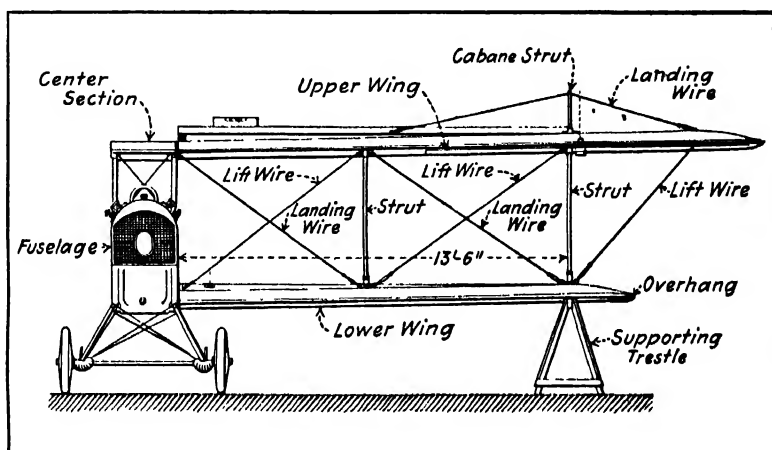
Diagram Showing how Braced Biplane Wing Assembly Forms a Complete Structure that may be Easily Assembled as a Unit to Biplane Fuselage.
